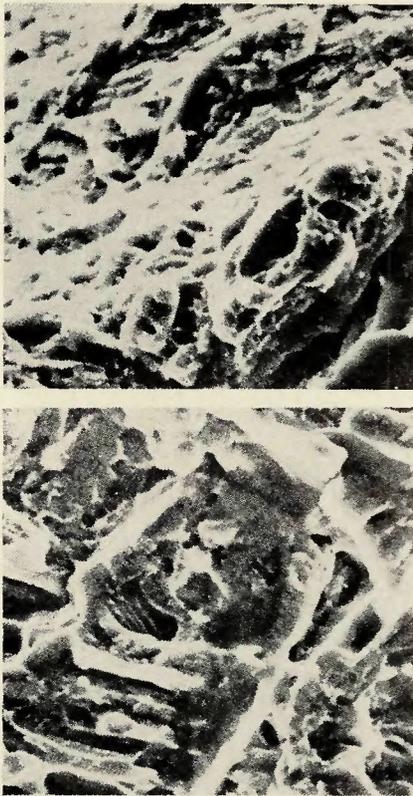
Fracture surface of joint bonded 4 hr at 1700° F and cooled to 1000° F in 15 minutes. A (top)—transgranular, ductile dimple rupture; B (bottom)—flat, transgranular cleavage-like rupture. X2000 (reduced 38% on reproduction)
